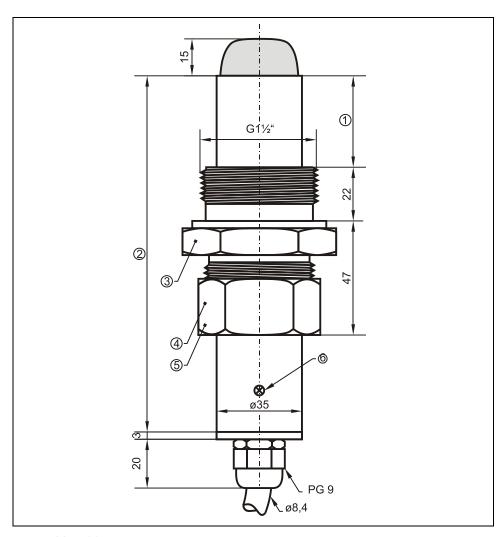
Dimensions wedge-shaped active Doppler sensor (KDA)
